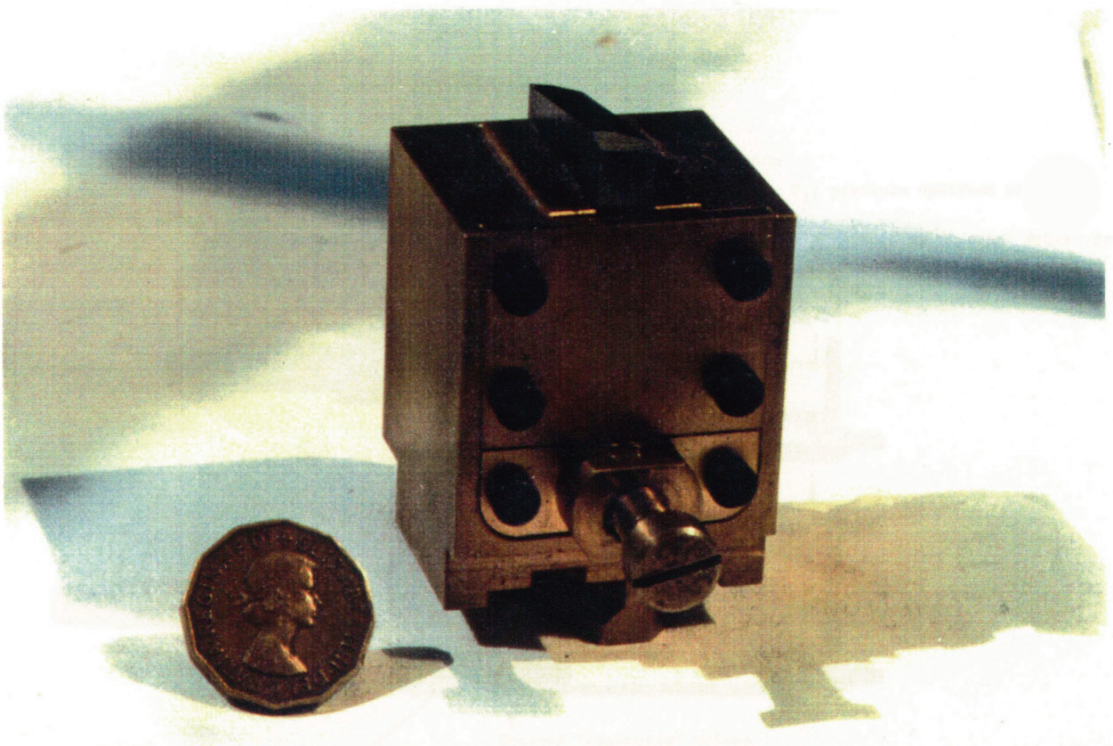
Disc-mounted cutter used to machine turbine blade overtip abrasion seal concentric with turbine shaft
